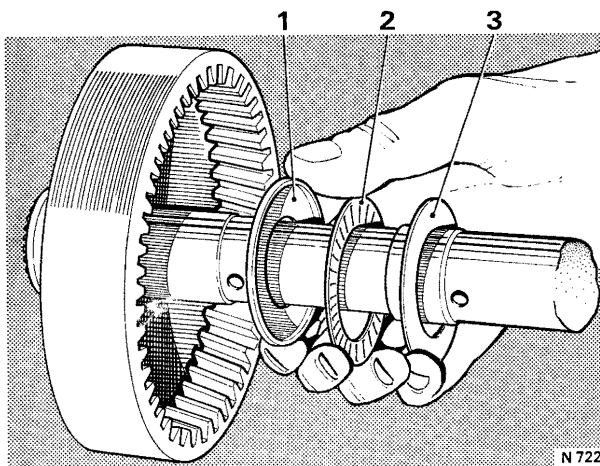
FITTING RACES AND THRUST BEARINGS TO INNER FACE OF REAR INTERNAL GEAR
